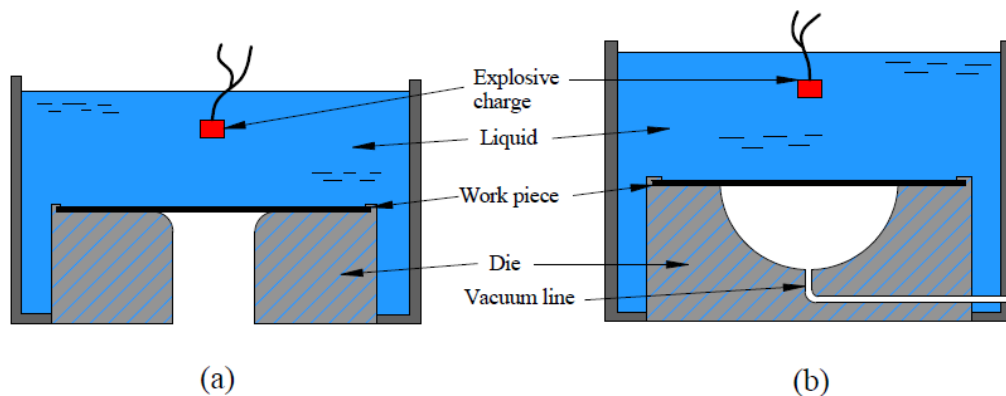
Example of (a) free forming and (b) die forming as accomplished with explosive forming.
